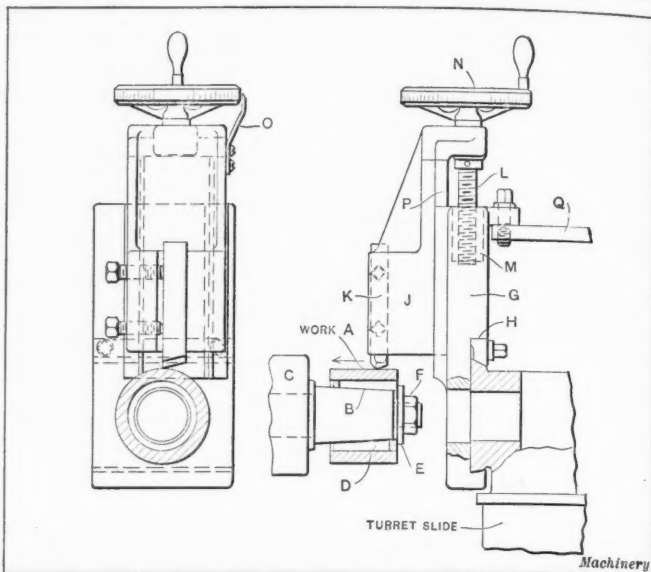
Adjustable Turning Tool for finishing the Outside of Short Bushings
